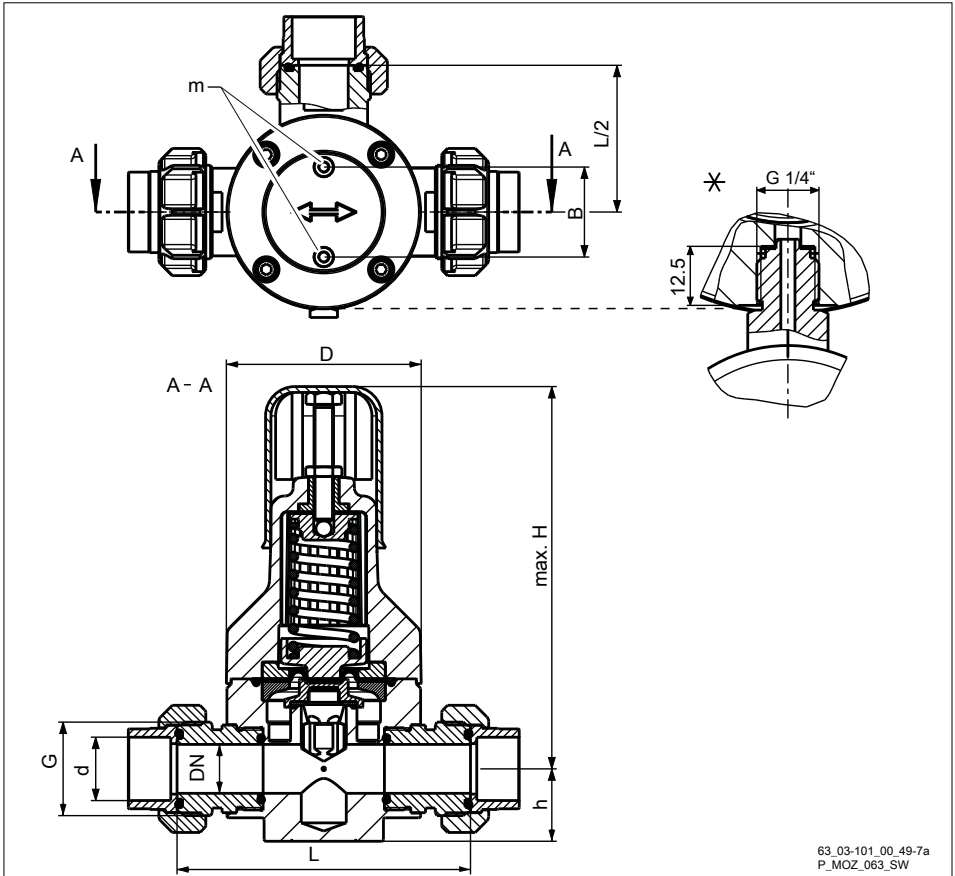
Dimensional drawing of DHV-UR PVC-U, PP, PVDF - dimensions in mm
